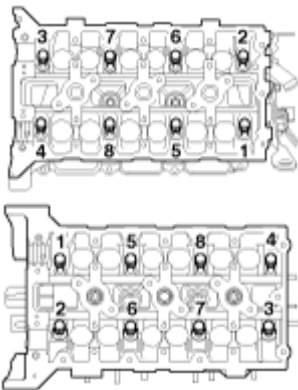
Identifying Removal Sequence Of Cylinder Head Bolts
